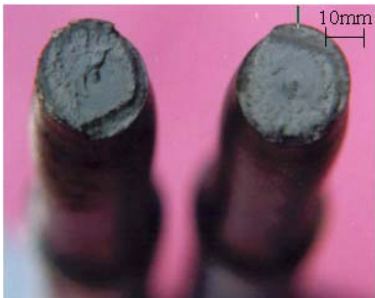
Fracture surface of the friction welded tensile sample.
